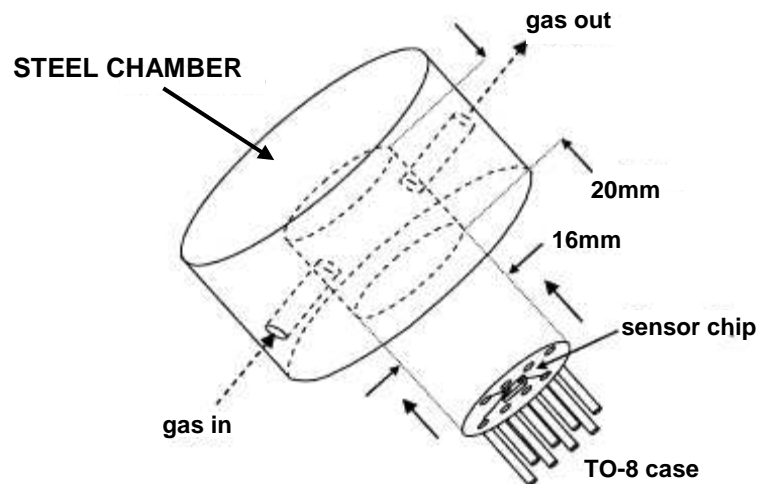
Chamber assembly with micro-machined sensor chip bonded on a TO8 case.
